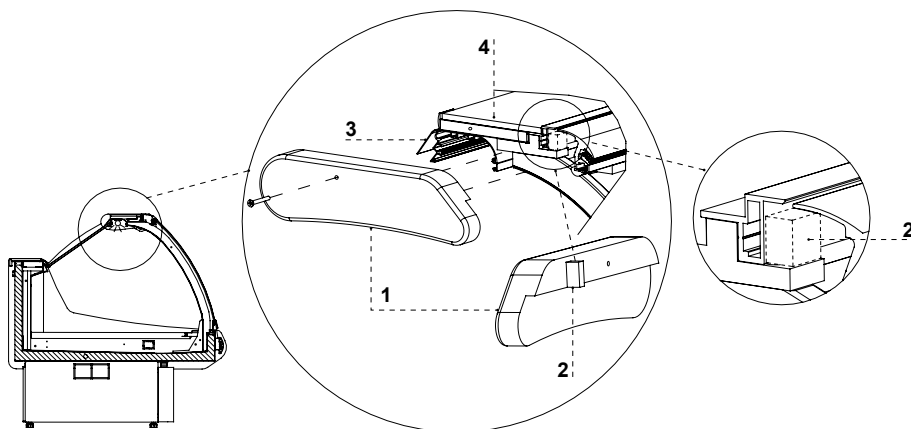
Assembly of the ABS lamp hole plug ("SP" version)
